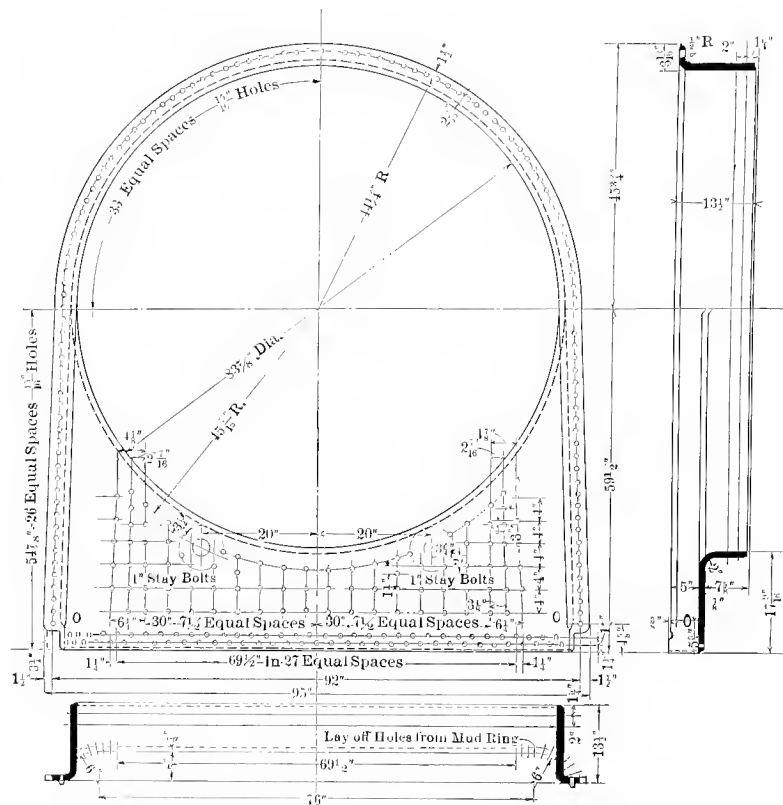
Detail drawing of throat-sheet, Jacobs-Shupert boiler.
